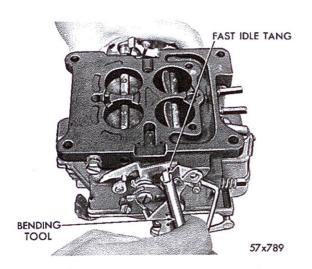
Fast Idle Adjustment (Rear Carburetor)
